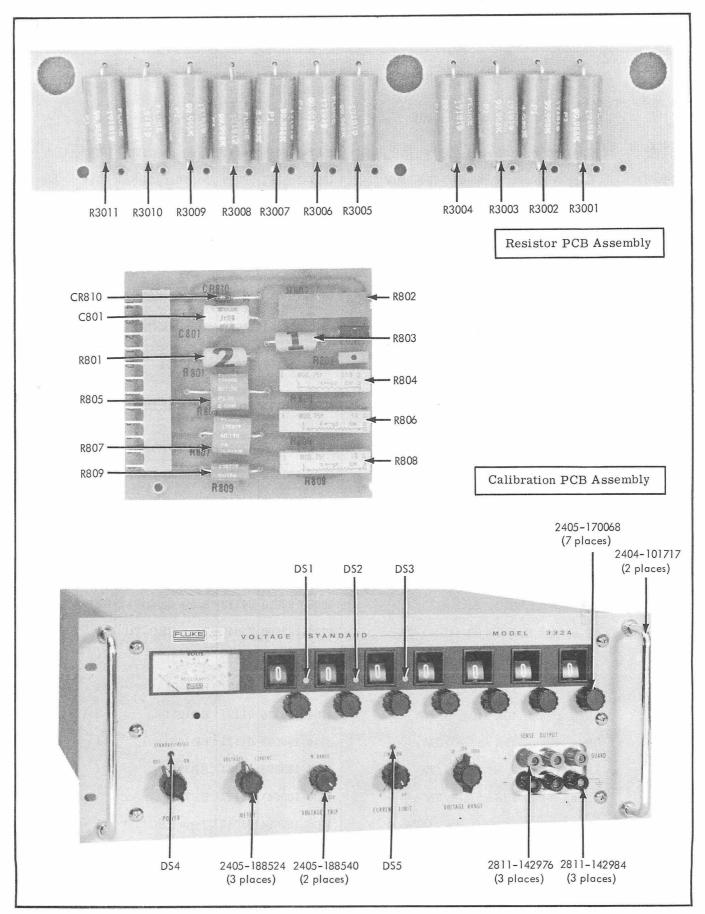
FRONT END ASSEMBLY (Sheet 4 of 4)
